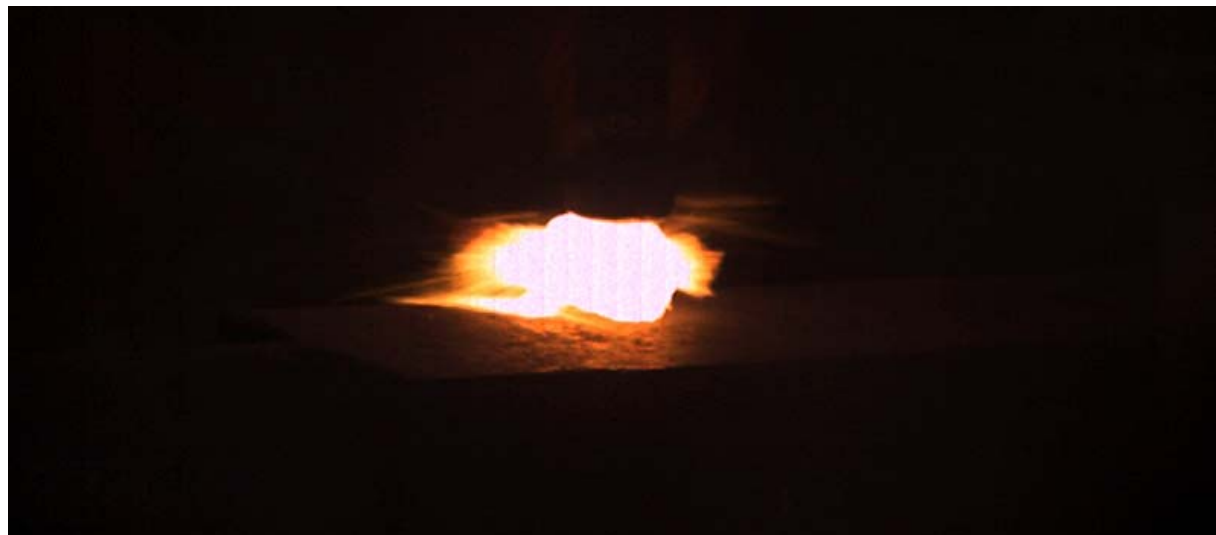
Welding experiment 16. Still from the high-speed digital camera 1 frame after the moment of impact
